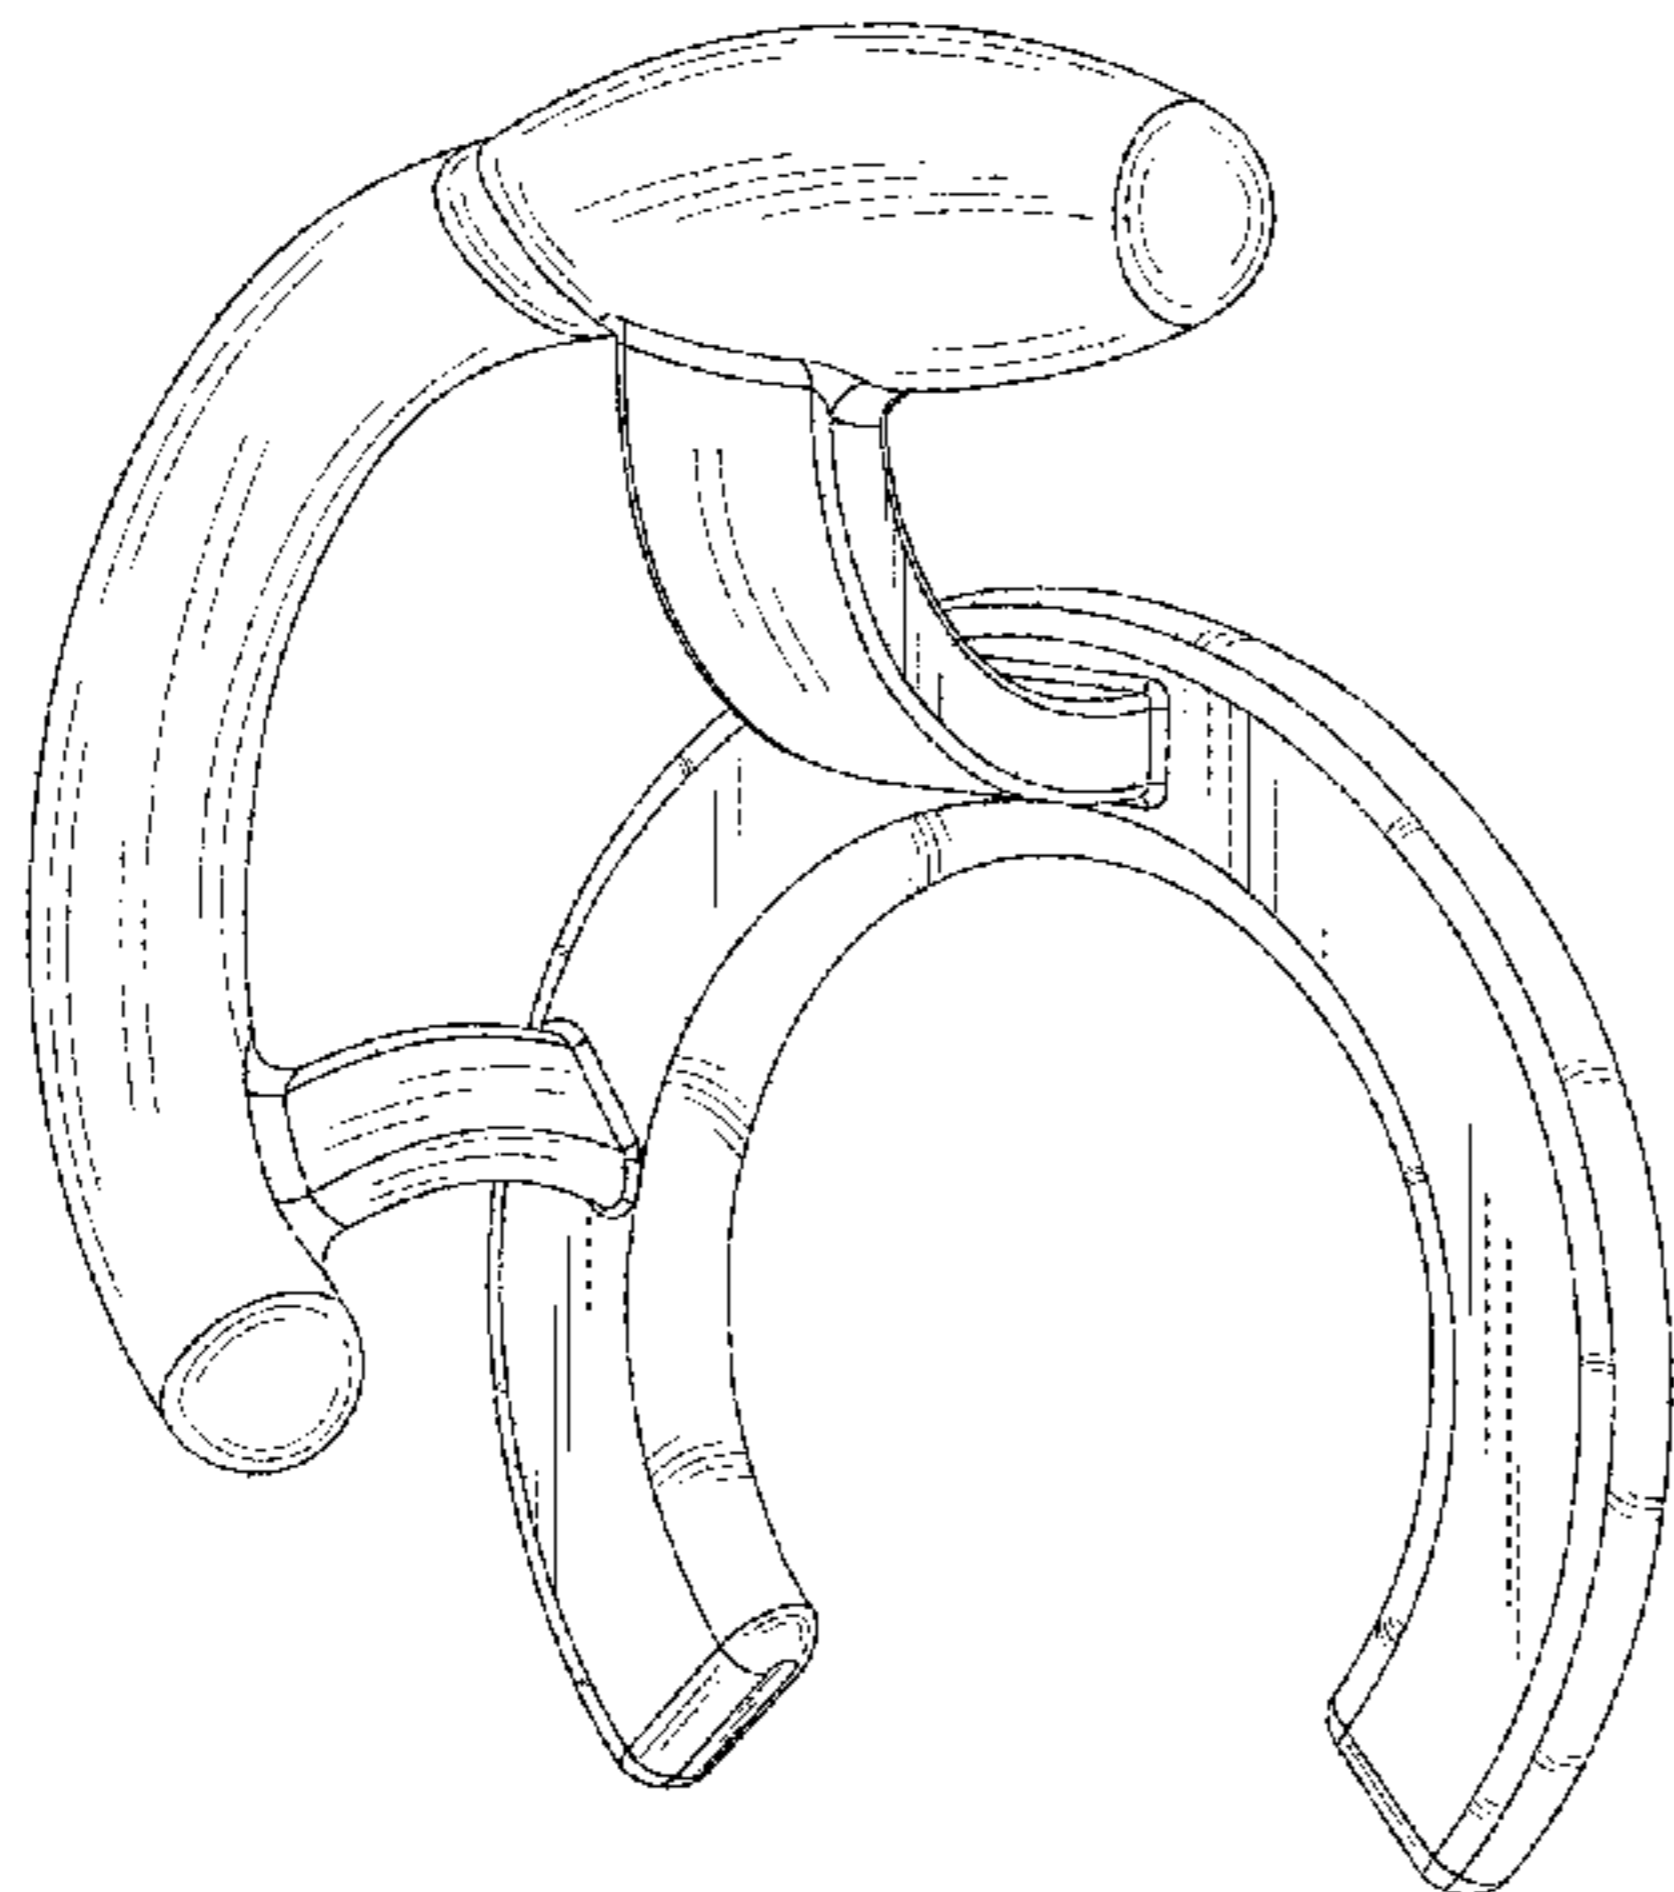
is a front right perspective view of an earpiece showing our new design;
